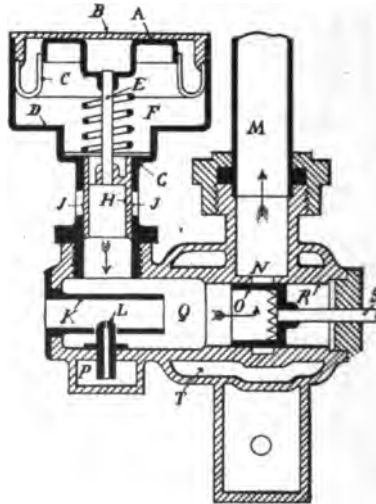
Section of the Krebs Mixer used with the later Panhard-Levassor Engines. The float chamber and other parts are identical with the Centaure carburetter. Gasoline comes from the float chamber through channel, P, and spraying nozzle, L, air being admitted at K. Q is the mixing chamber from which the air and gasoline gas passes into the feed tube, M, through the port, H, whose opening is controlled by the position of the serrated perforations in piston, O, moving through bore, R, as controlled by the governor through piston rod, S. When more air than the fixed quantity admitted at K is required by the conditions of motor operation, the suction of the motor piston depresses the small piston, A, held in cylinder, F, by the spring, E, and sliding in the elastic diaphragm, C. Air is admitted above it through a small port at B. The depression of piston, A, and causes the slide, H, to move downward in tube, G, thus opening to a greater or less degree the ports, J and J, admitting the required amount of air for any given condition.
